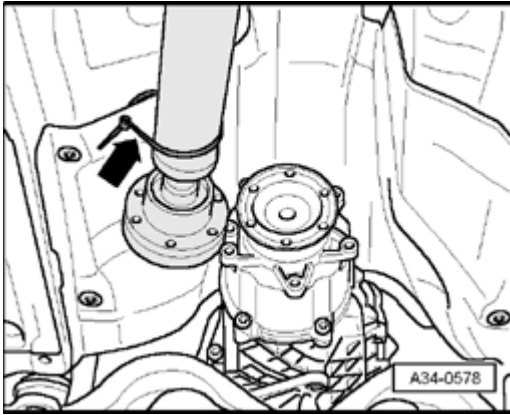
Drive Shaft Tied To Side, Onto Heat Shield
